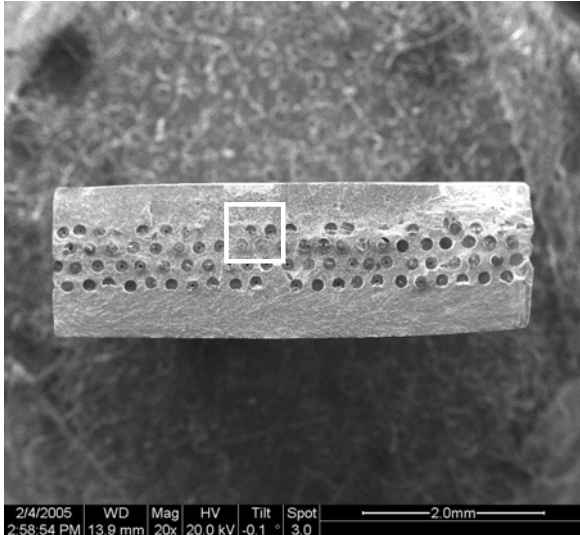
Specimen F/G-08, fracture surface (looking toward alloy side)
